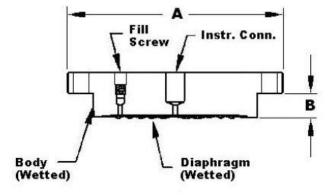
Seal Dimensions (Chemical TEE "Taylor Wedge" Seals
